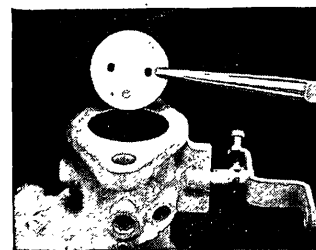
Install throttle shaft and lever, and throttle valve. Back out throttle lever stop screw. Small "c" part number on face of valve should be toward idle port when viewed from manifold side of flange. Center throttle valve by tapping lightly before tightening screws. Always use new screws
